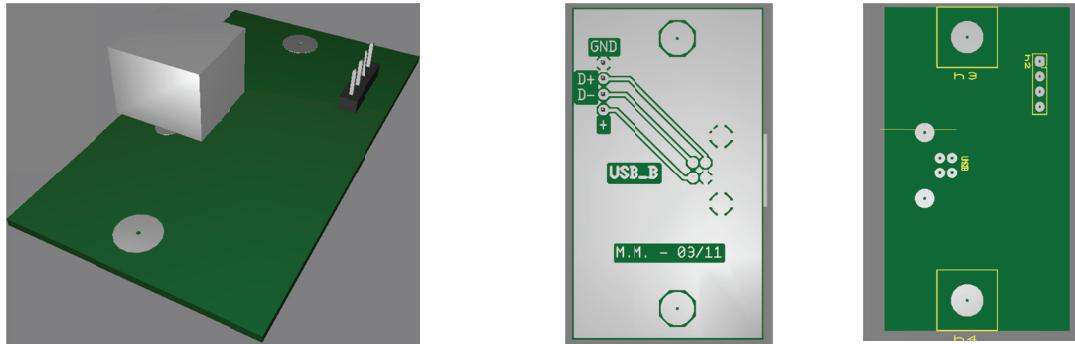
USB connector sub-board; just the USB B-type connector, a 4-pin linear header and two screw holes.
